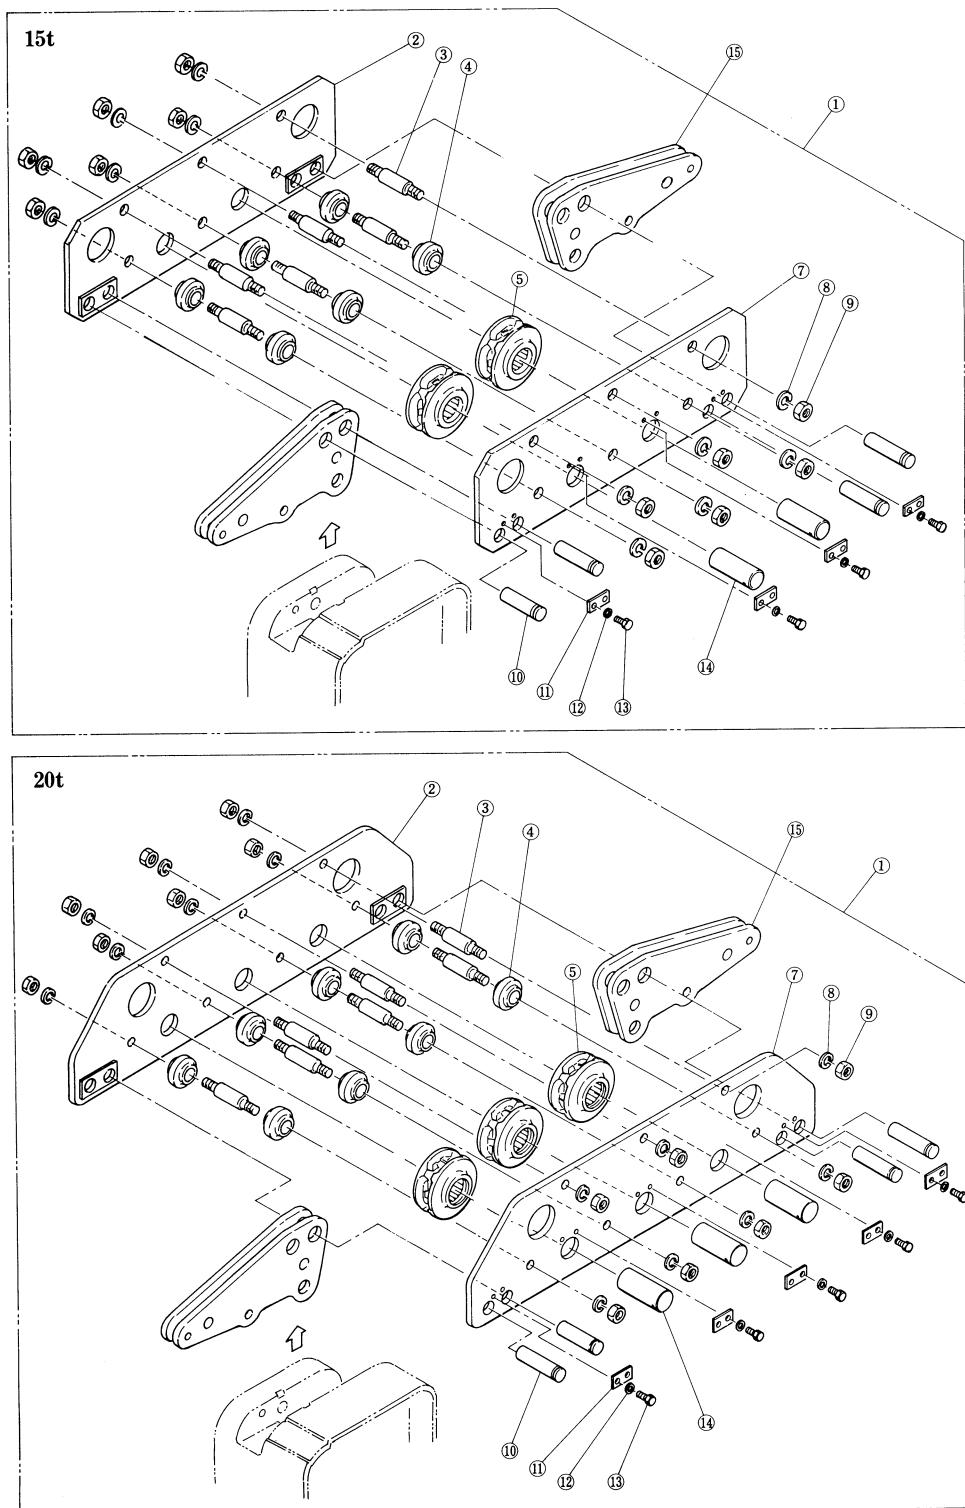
Top Suspension Plate Parts 15 & 20 Ton
